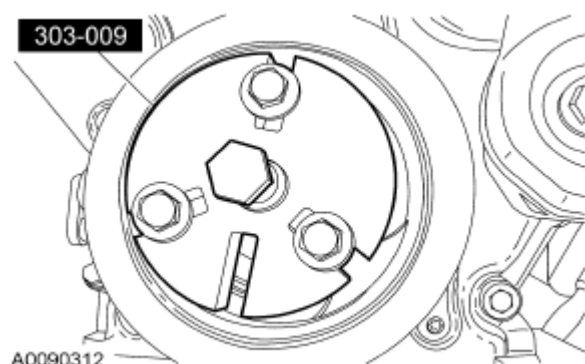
Removing Crankshaft Pulley Using Special Tool (303-009)
